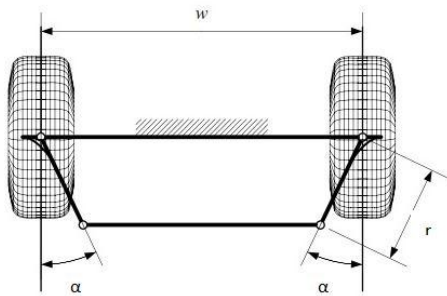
A TRAPEZOIDAL STEERING MECHANISM.
